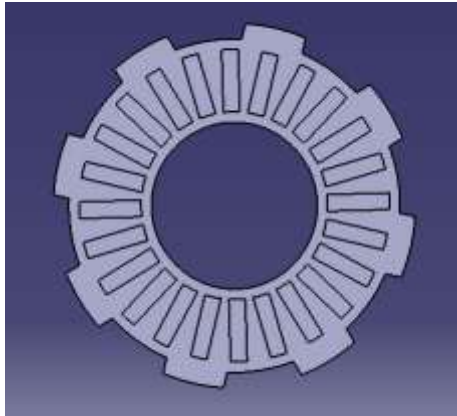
Clutch discussed for analysis of Multi-Plate Clutch
